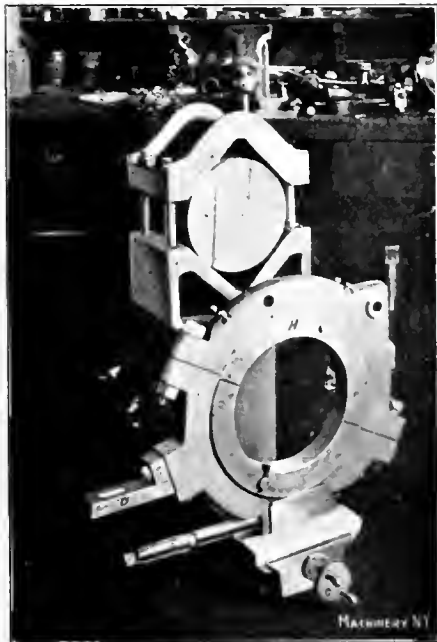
Tool for Turning Inside Crank-axle Bearings
